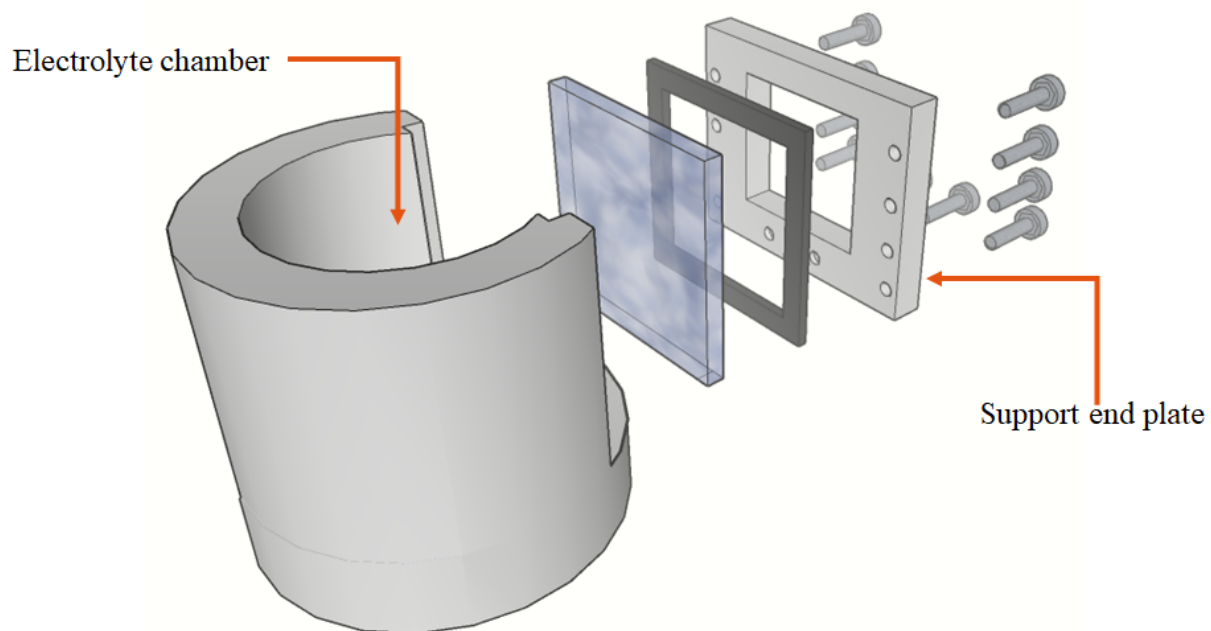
Back view of assembly of the photo-electrochemical cell.
